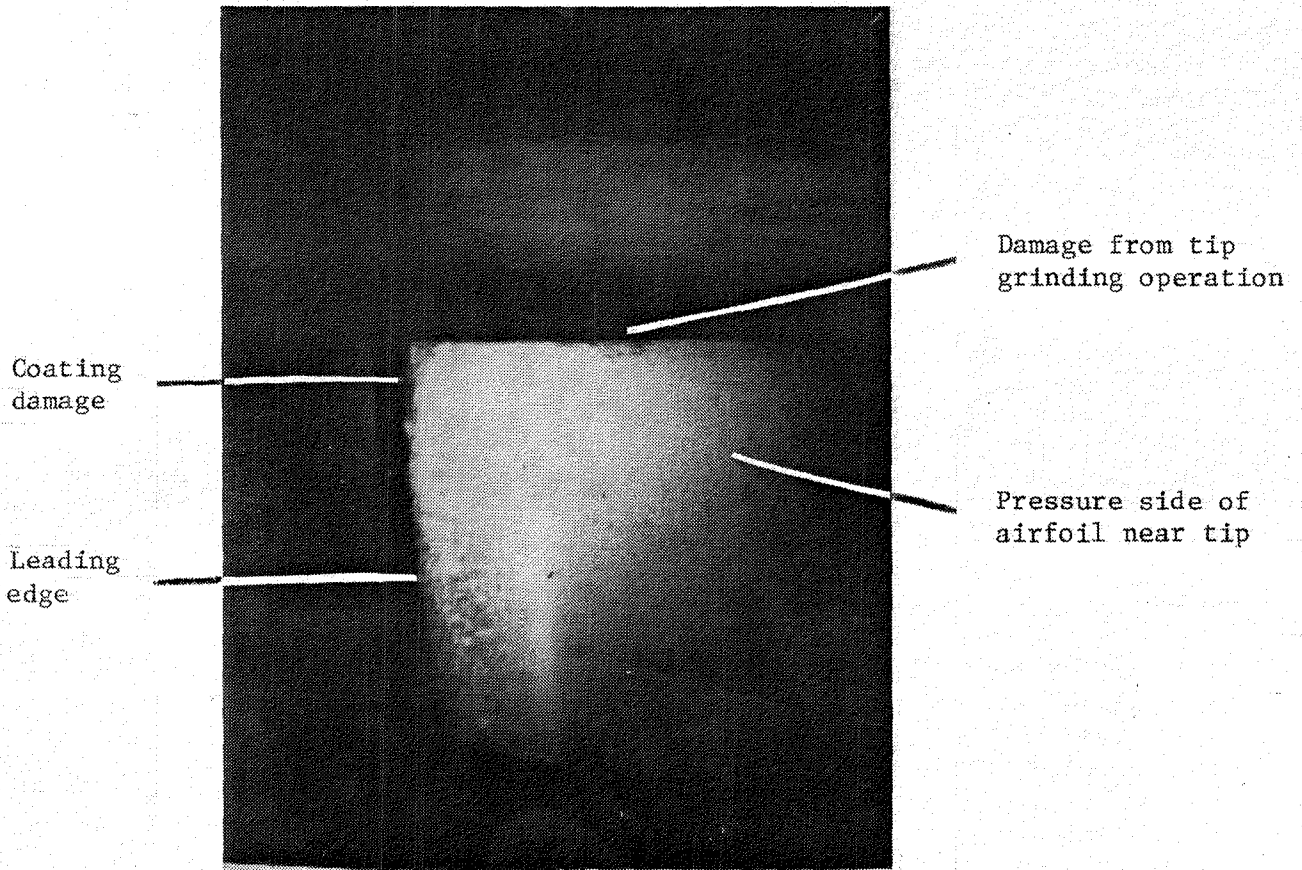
Borescope Photograph of Coating Damage After 27 Hours of Engine Checkout (Blade A2139).
